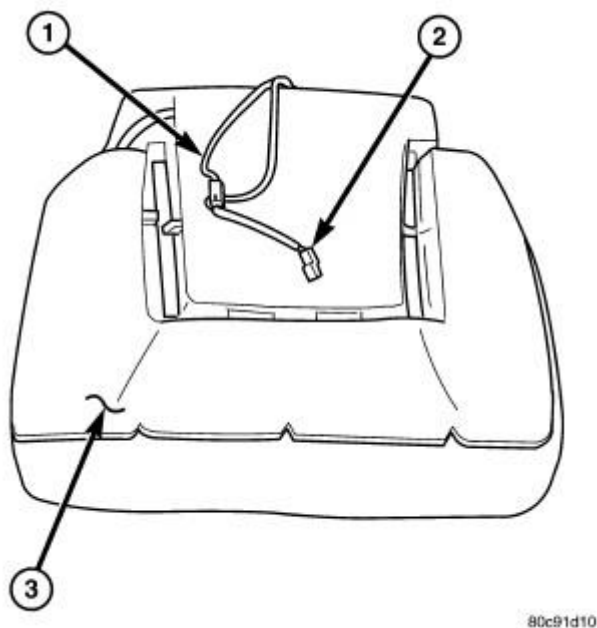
Identifying Seat Back Element Electrical Connector And Heating Element
